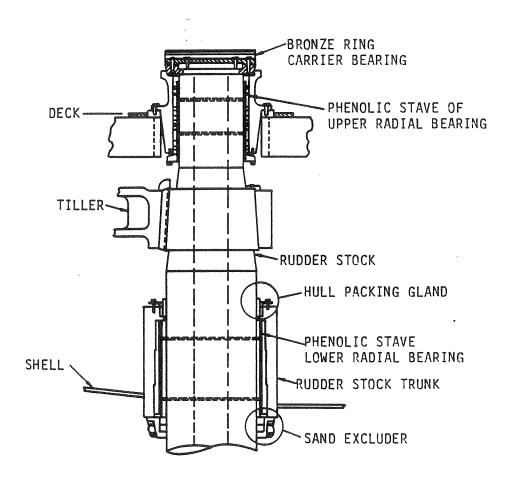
RUDDER STOCK BEARING TYPICAL ARRANGEMENT "A"
